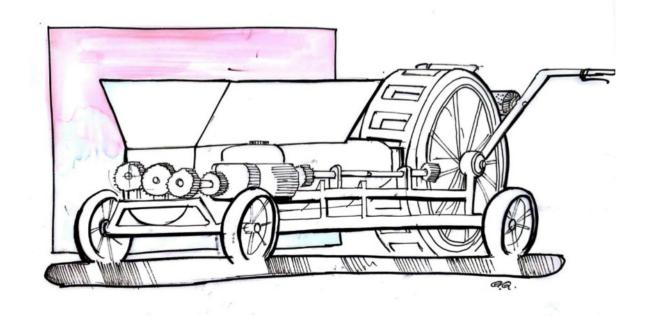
(Ideation of modified cart type brick mouldign machine)
